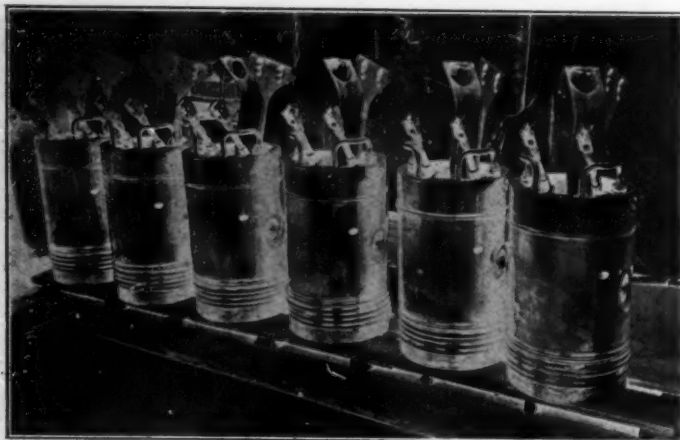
THE PISTONS OF THE 1750-HP. ENGINE REMOVED
